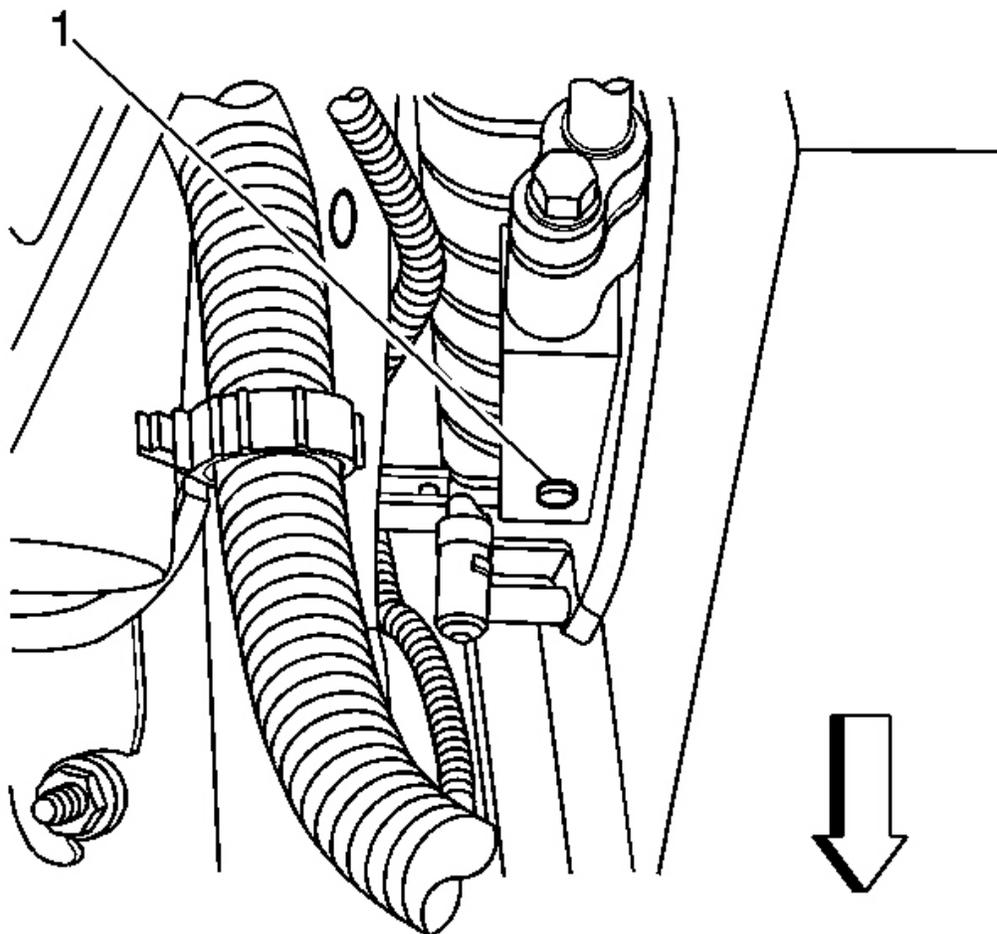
Removing/Installing RH Radiator Air Baffle Upper Retainer Pin
